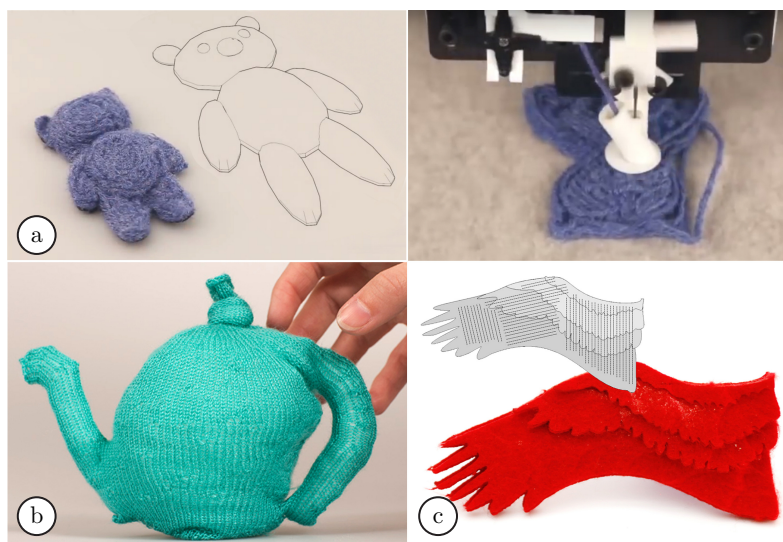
Soft 3D Printing: (a) printing with a felting needle [Hudson, 2014], (b) a 3D object created with a knitting machine [McCann et al., 2016], (c) cutting fabric from a roll and laminating it [Peng et al., 2015a].
